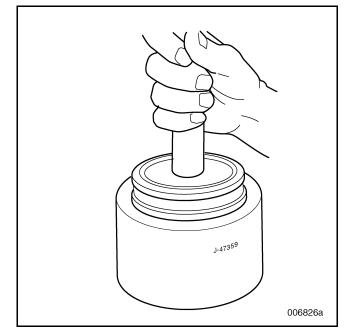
Inserting Range Shift Piston into Seal Sizer/Piston Installer (Tool No. J 47359)
